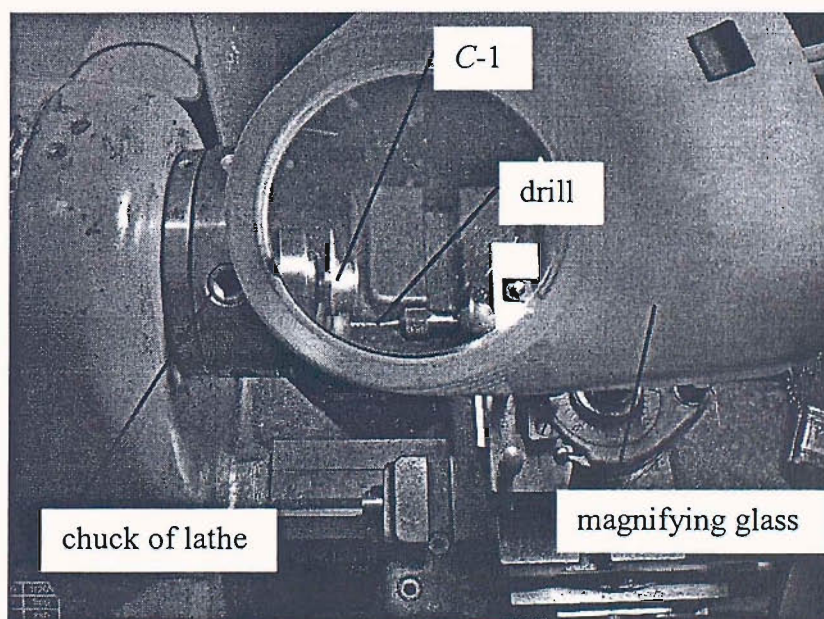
Drilling diameter 1.2mm holes in the lower cover [209]
